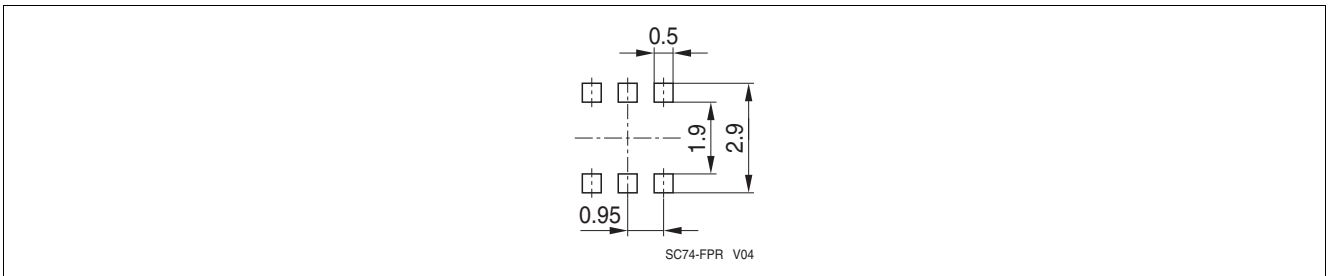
Package Footprint for SC74 (dimensions in mm)
